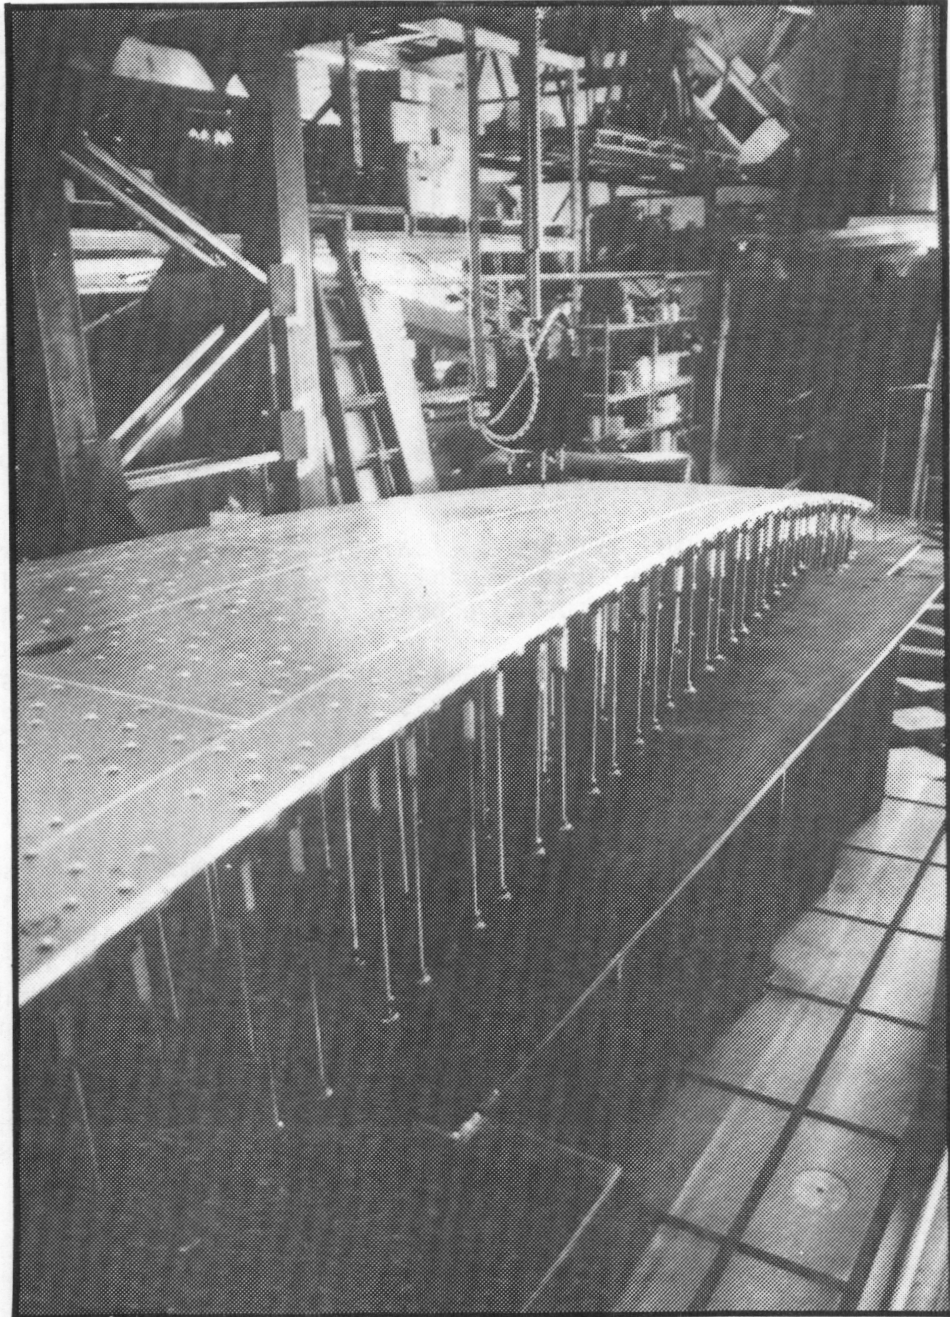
ADJUSTABLE MOLD SURFACE
